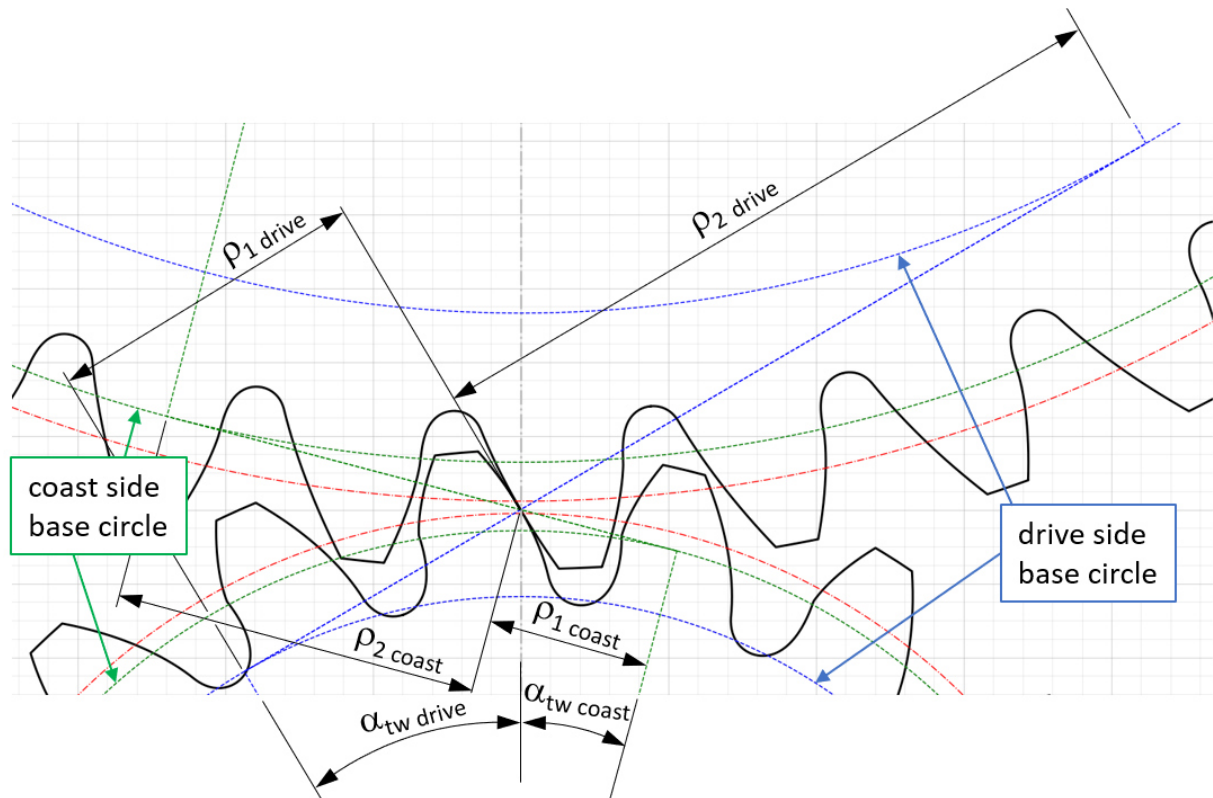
Osculation radii of involute gearset for single tooth contact in the mesh point.
